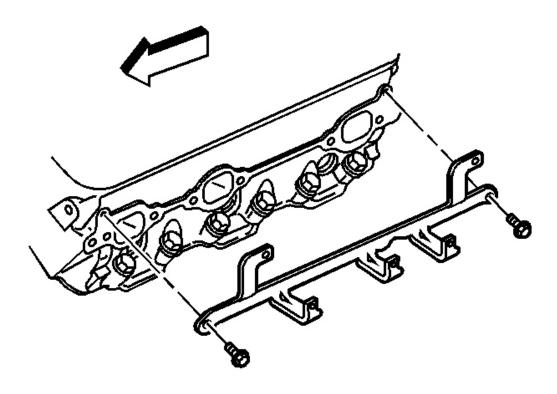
Locating Spark Plug Wire Support Courtesy of GENERAL MOTORS CORP.
